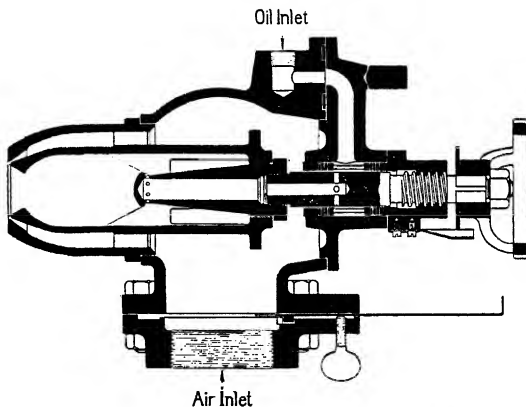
Low-pressure air inside-mixing type oil-atomizing nozzle. (Courtesy of Schutte and Koerting Company.)
